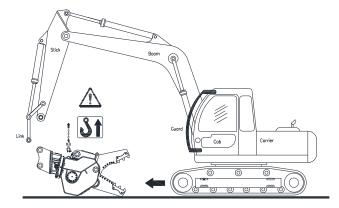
Typical Pin-on Type Mounting to Carrier
